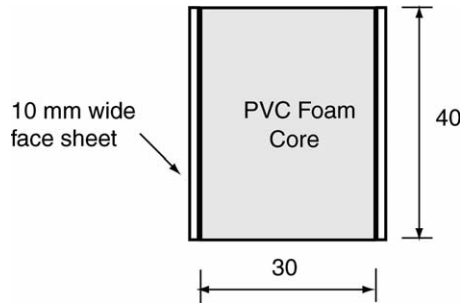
Sandwich column compression specimen (dimensions in mm).
